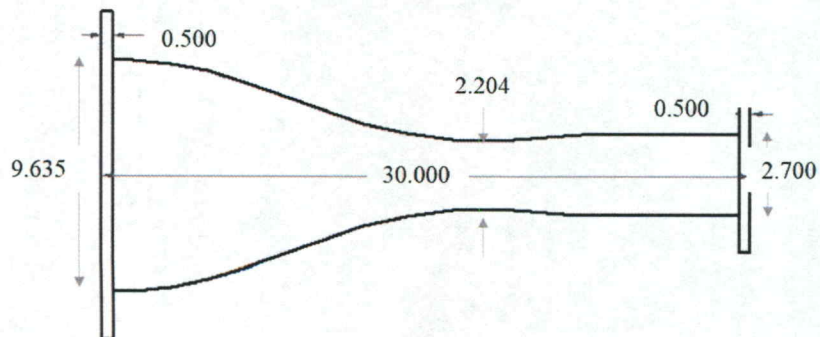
Side view from a technical drawing of the converging diverging nozzle. Flow enters from the left.
